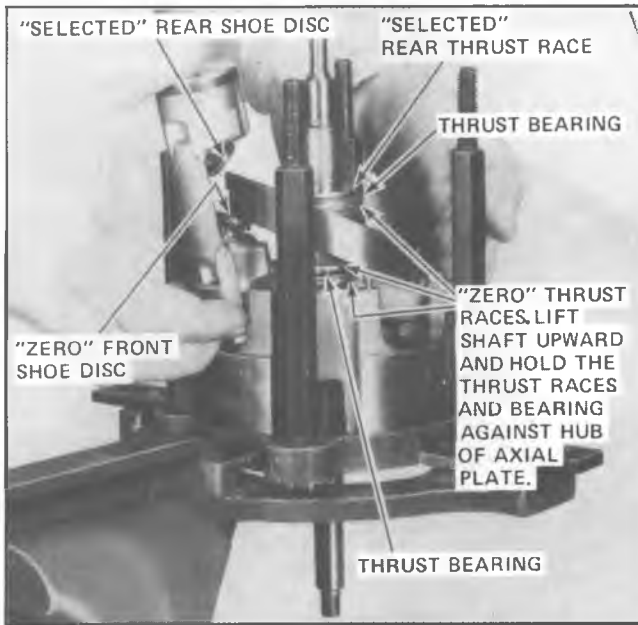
Installing 1st A-6 Piston Assembly Into Front Cylinder Half
